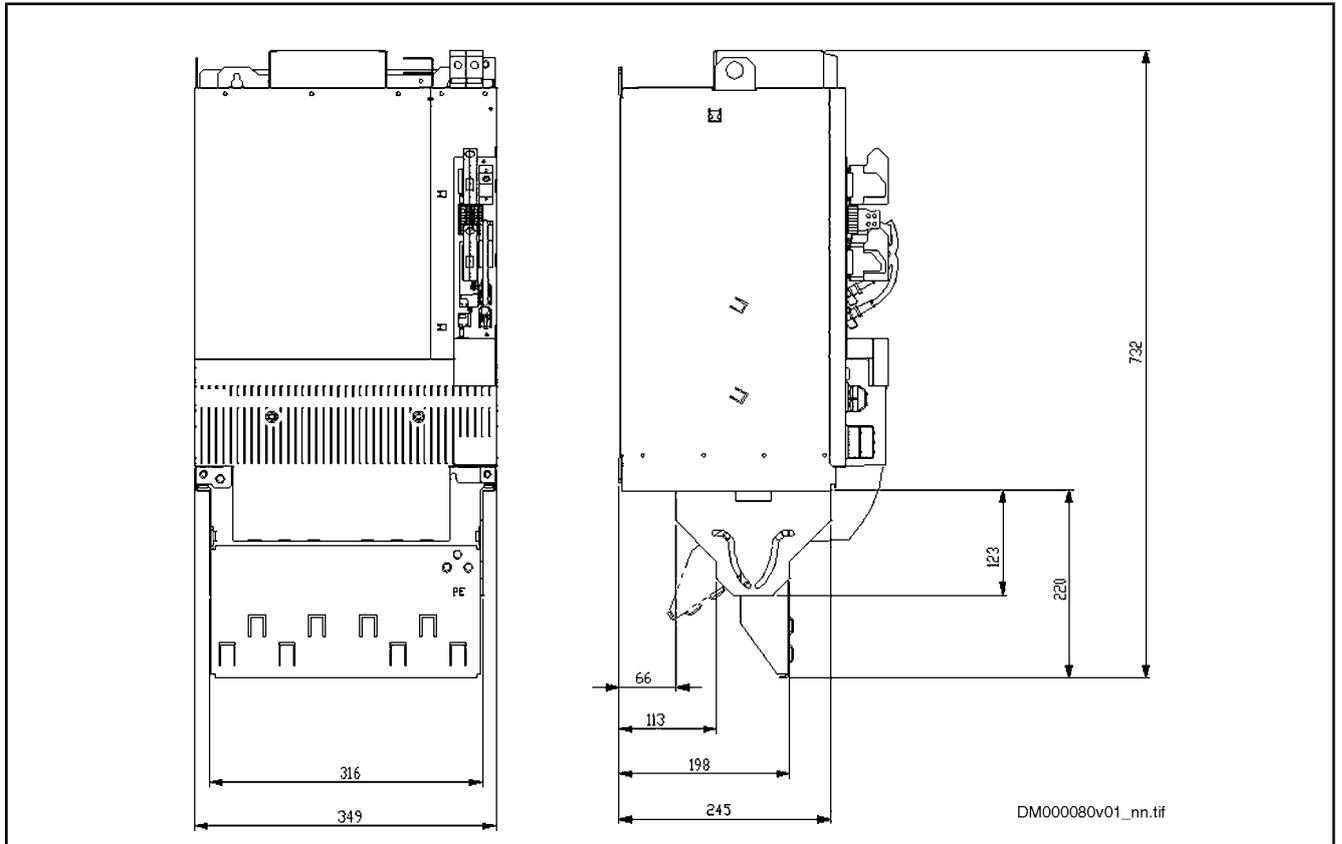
Dimensional drawing HCS03.1E-W0210 with HAS02
